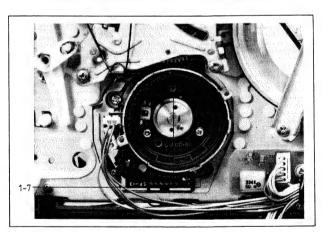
Cylinger Motor (Cylinder FG PC Board)
